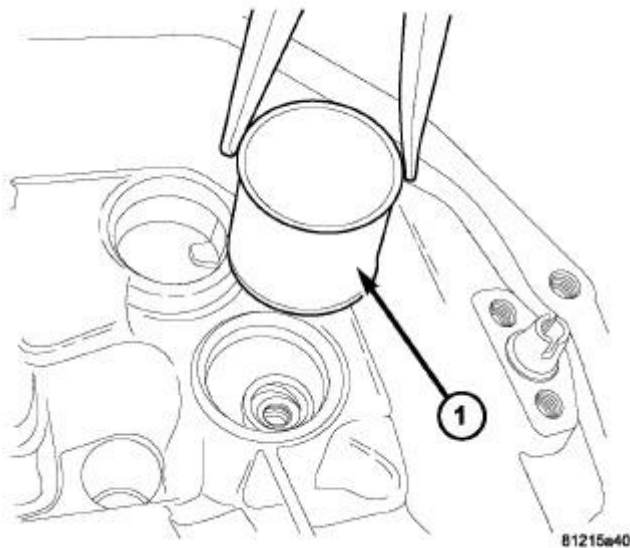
Remove/Install Low/Reverse Accumulator Piston
